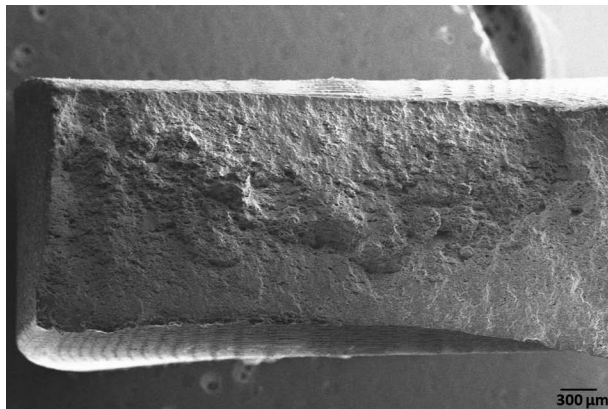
Fracture surface of room temperature tensile-tested aluminum alloy AA 2014-T6 sheet
